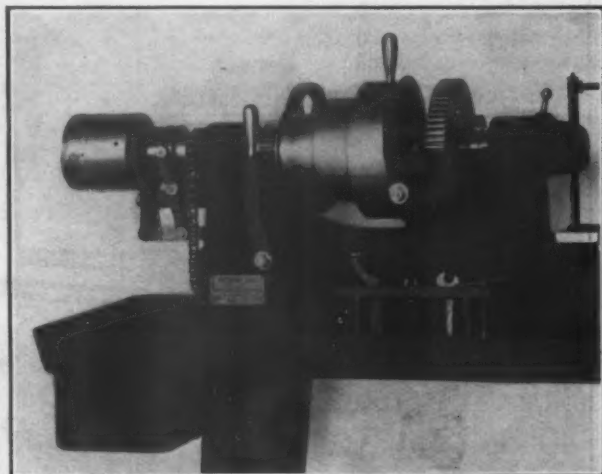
The Casings Removed, Showing the Arrangement of the Friction-Geared Head.
